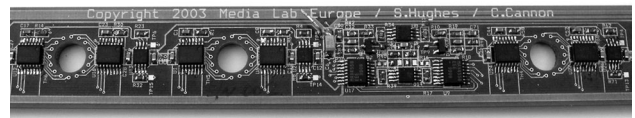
Close-up of a section of the 4-layer PCB which contains all the electronics. The sense pads are located on the rear of this PCB.
